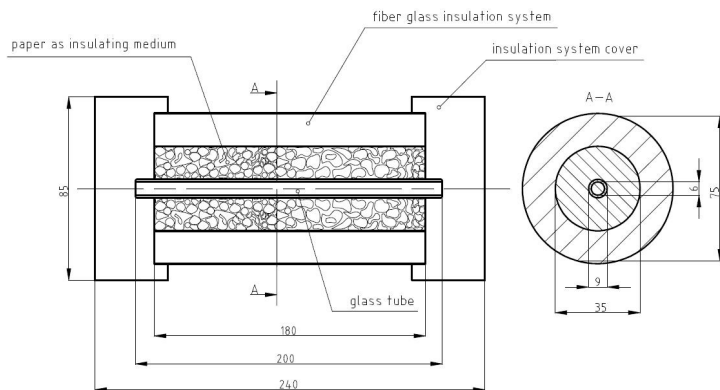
Insulation system for slow cooling of glass tubes with extruded polymer
